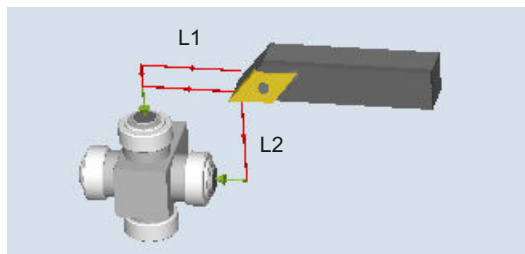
Measure: Turning tool (CYCLE982), example: Complete measuring
